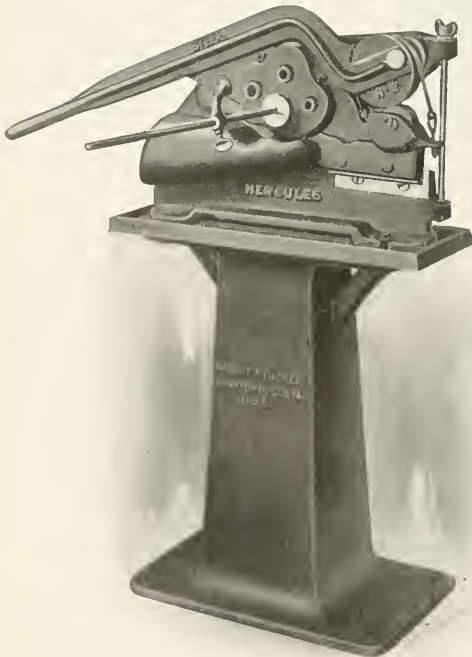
W. M. & C. F. Tucker No. 2 Shear and Rod Cutter
